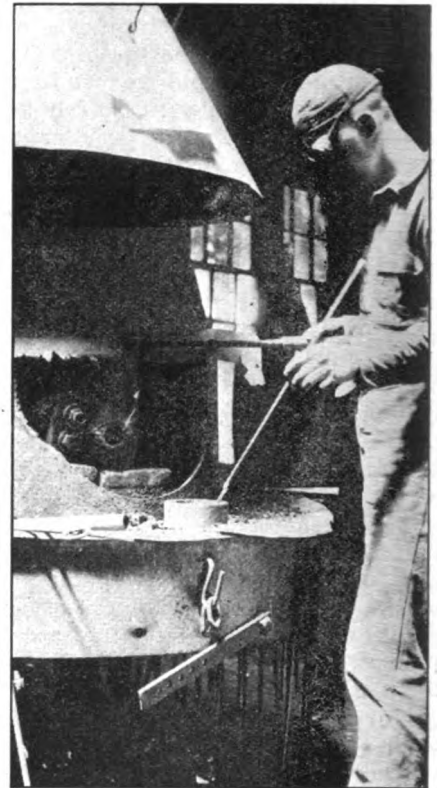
THIS SHOWS THE WELDING POSITION OF THE CASTING SHOWING HEATING OVEN IN PLACE
